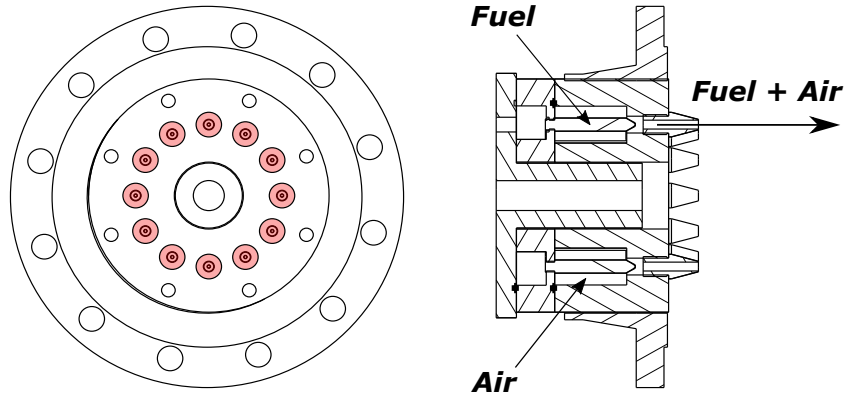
Schematic of the burner head and cut through with the fuel and oxidizer nozzles highlighted
